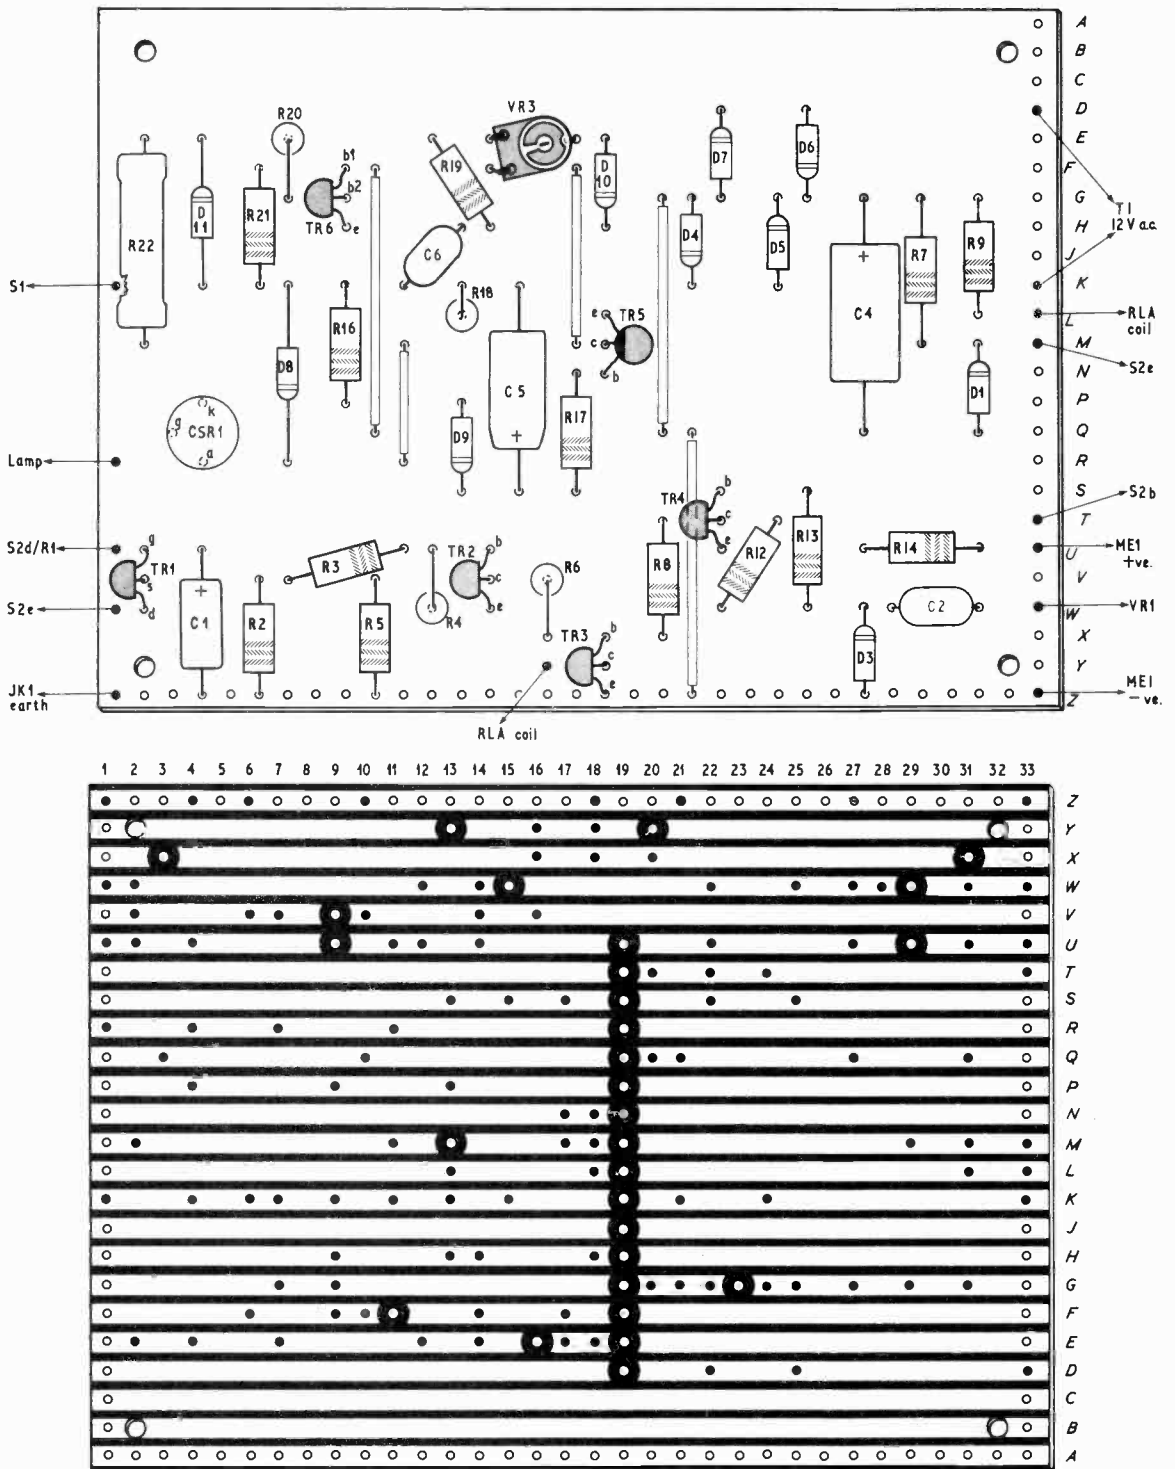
Layout of components and underside of circuit board showing breaks in copper strips
